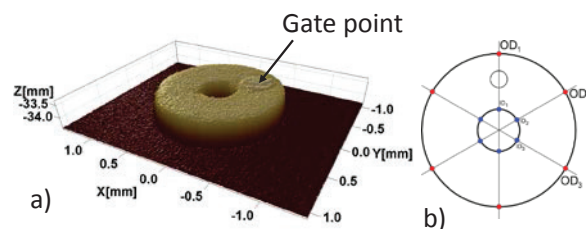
a) 3D captured image of TPE suspension ring; b) measurement strategy adapted to dimensionally characterize produced rubber rings.
